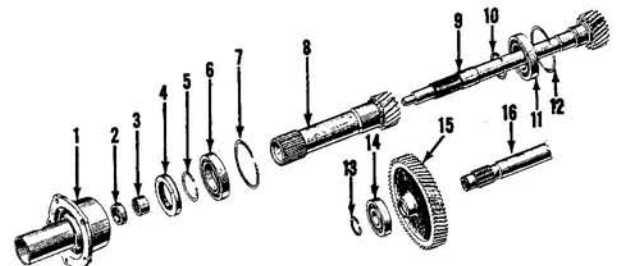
Exploded view of primary transmission on Fordson Dexta single clutch models. Fordson Super Dexta and Ford 2000 Super Dexta transmissions have a floating type roller bearing instead of needle bearing (4). Also, all models produced after Fordson Dexta Serial No. 957E-63953 have cap screw threaded into reverse idler shaft (19) to retain idler instead of long bolt, washer and nut shown.
